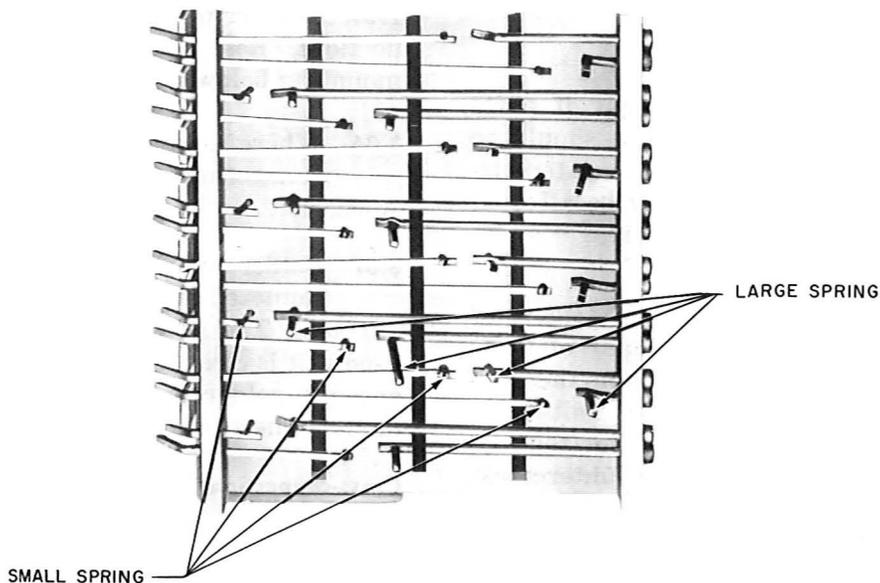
Rear View of Connector Showing Spacers and Springs
